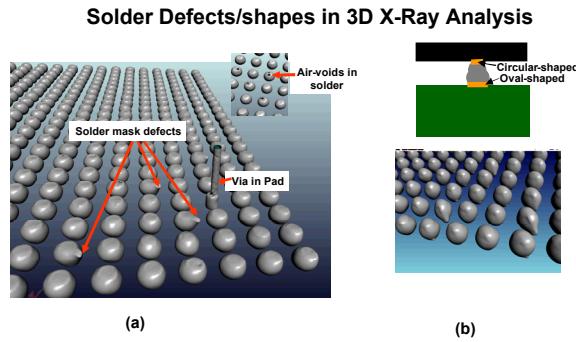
(a) 3D X-ray-CT analysis of solder mask defects, via in pad defect and air voids in solder joints. (b) Solder joint shape when solder pads in the board are oval-shaped.
